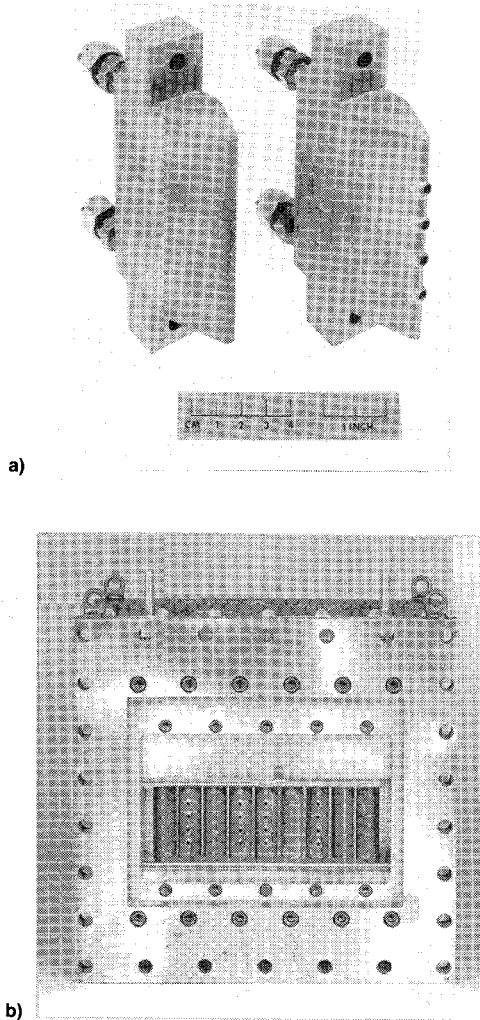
Water-cooled exhaust valve: a) pylons and b) assembly.
